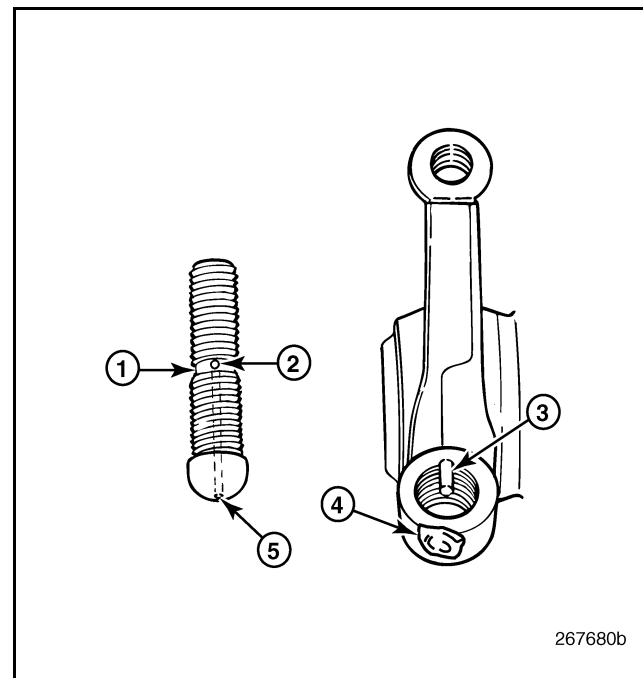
Rocker Arm and Adjusting Screw with Oil Passages (Introduced January 2002)
